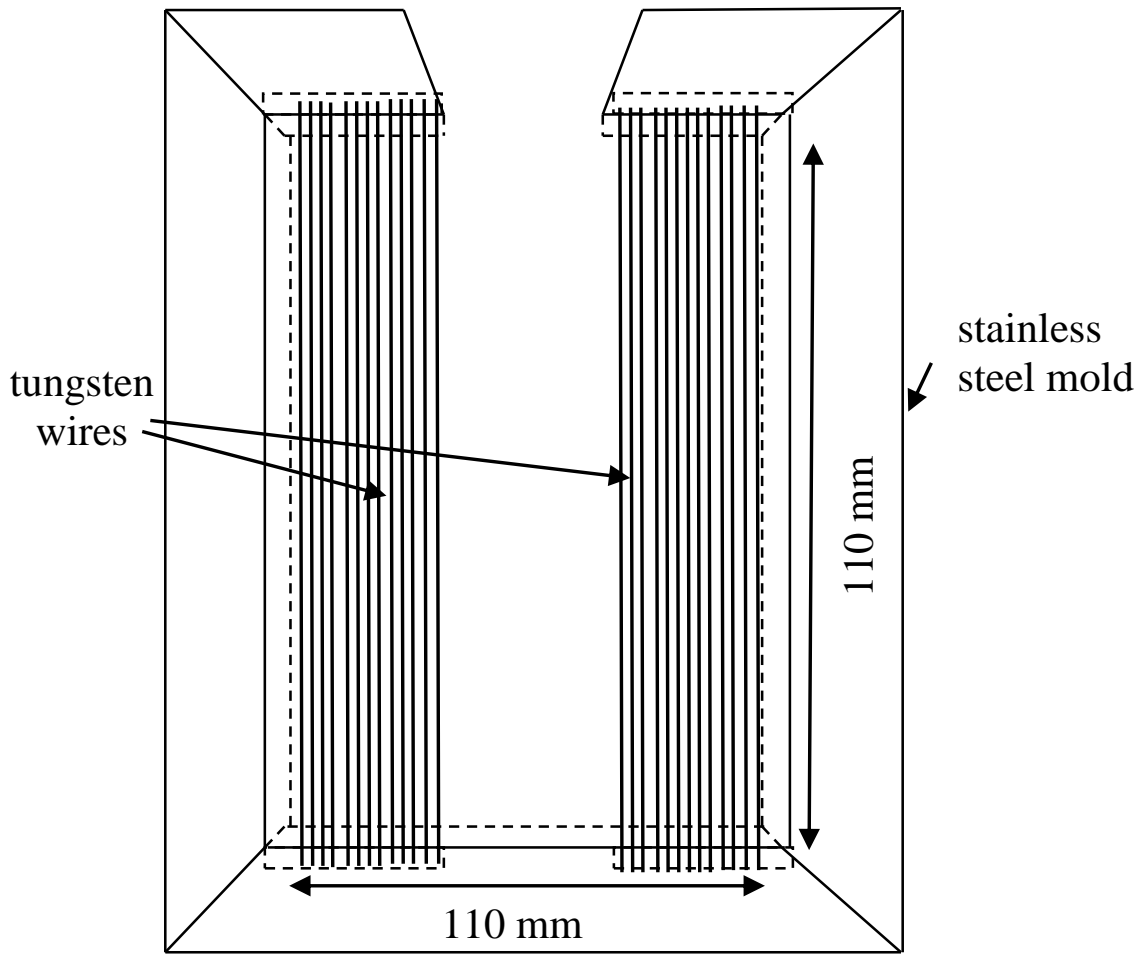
Schematic diagram of stainless steel split mold used to cast the composites. The tungsten wire arrangement is shown inside the mold.
